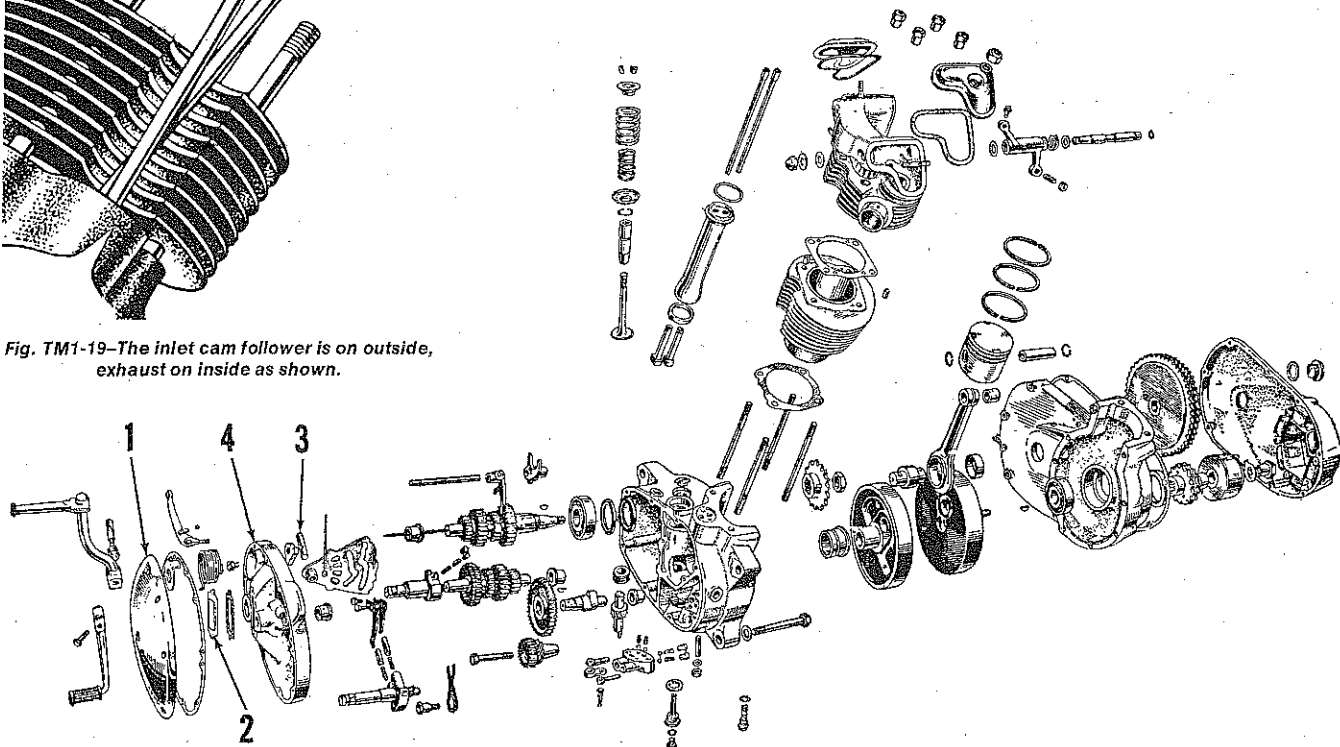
Exploded view of the engine assembly used on early models. Late models are similar.
